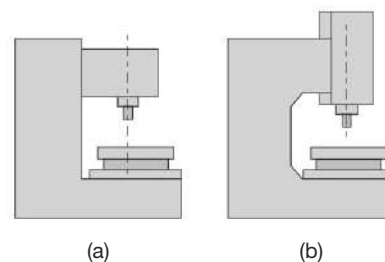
Spindle assembly with the sideways of CNC vertical axis machining centre
